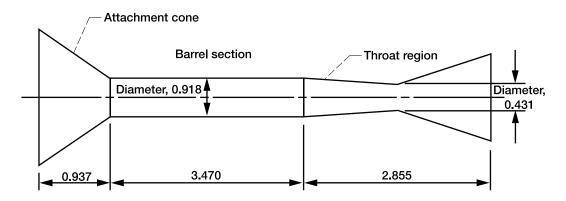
Iridium liner drawing (all dimensions in centimeters).
